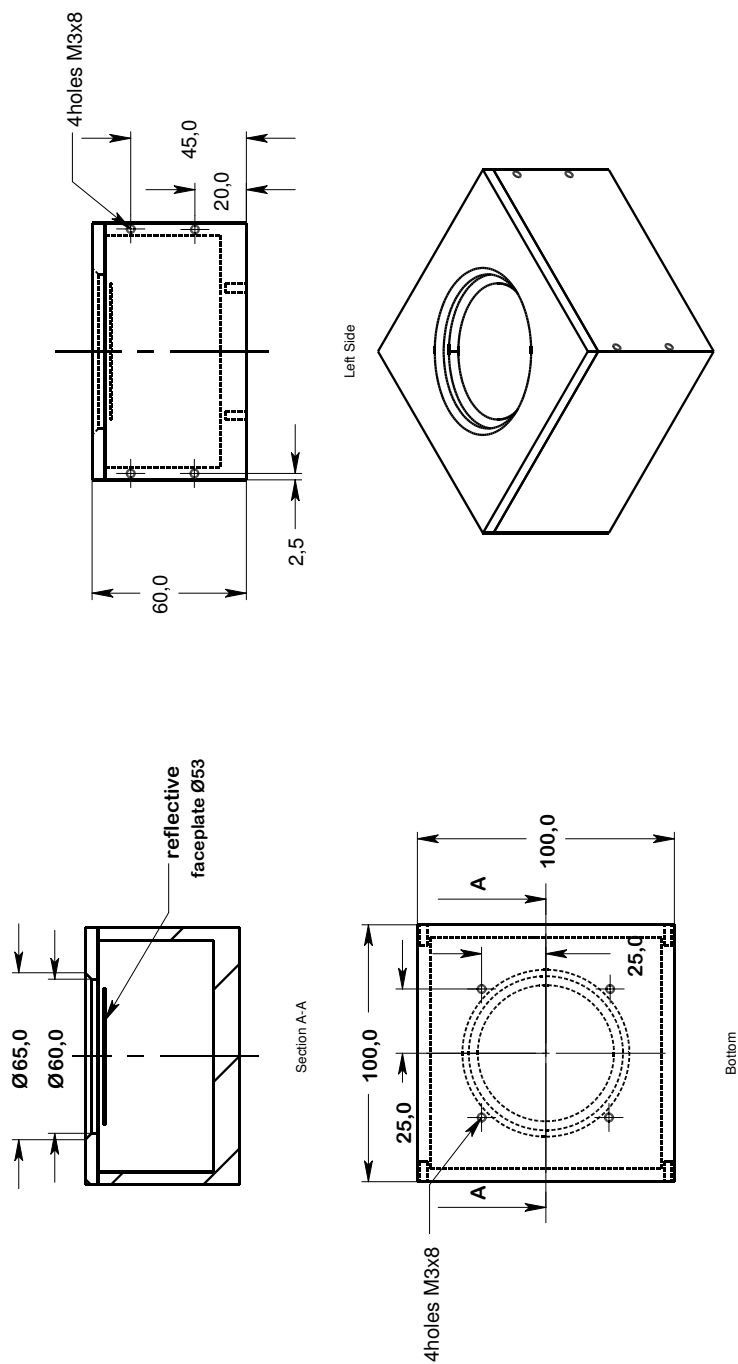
Technical drawing of the package and mounting holes of the 50mm 109-channel PDM
